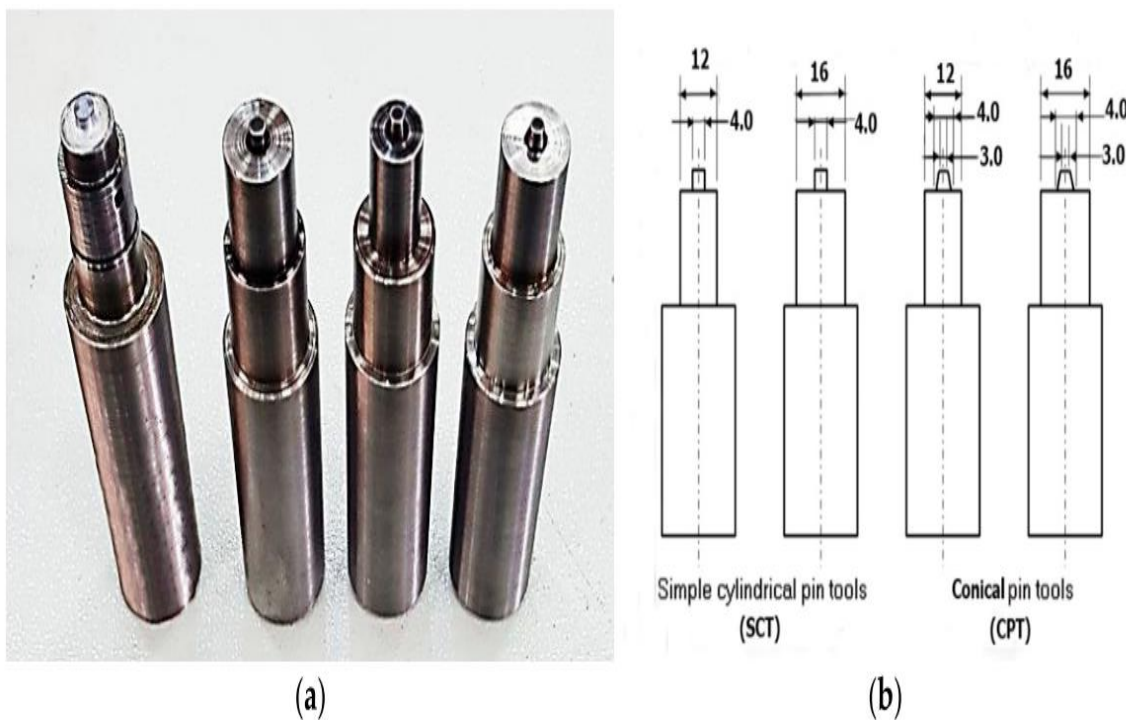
The FSSW tool: (a) cylindrical and conical pin tools with simple geometries; (b) a schematic illustration of the tools depicting their shared constant pin length
